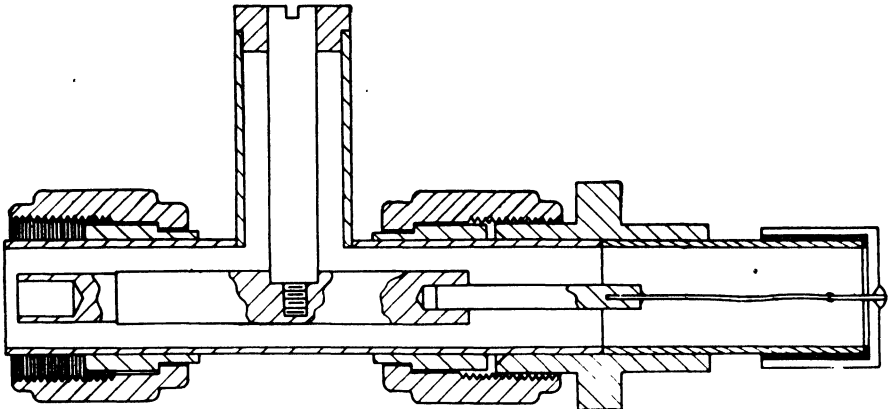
Section drawing of bolometer with metalized-glass tube.
